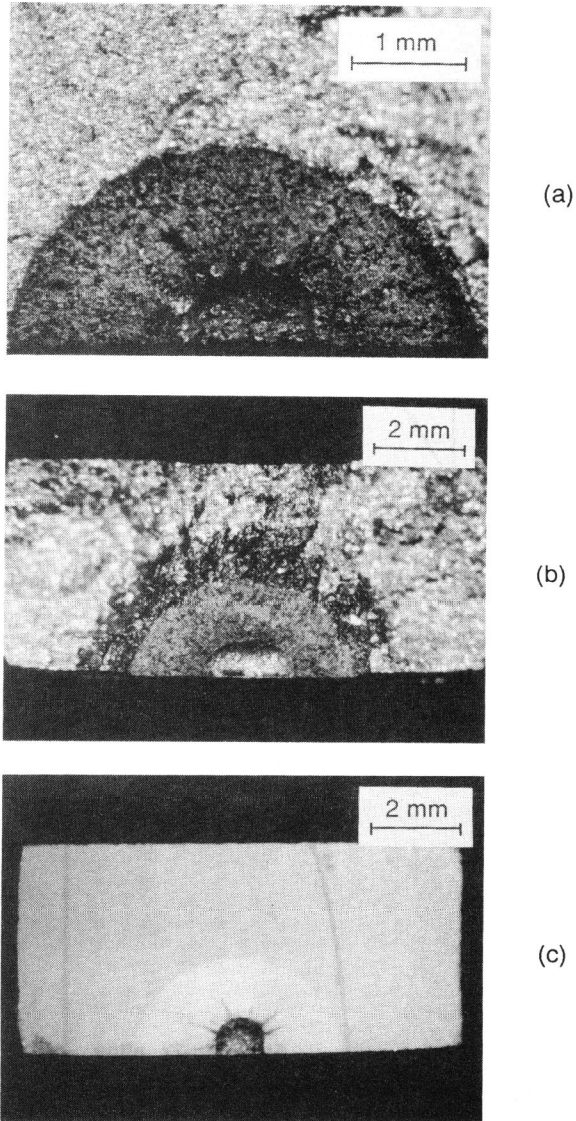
Typical appearances of the fracture surfaces and shapes of fatigue precrack: (a) as-swaged Mo, (b) recrystallized Mo-Ti-Zr alloy, (c) PM Al-Fe-Mo-Zr alloy.
